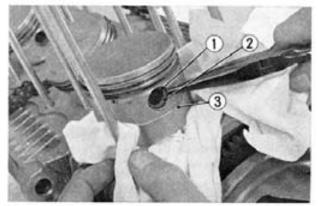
① Piston pin clip ③ Piston ② Piston pin
